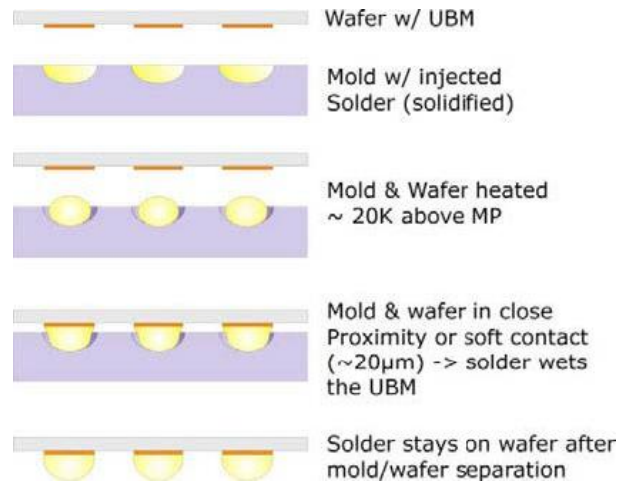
Process of solder transfer in C4NP technologies [91]
